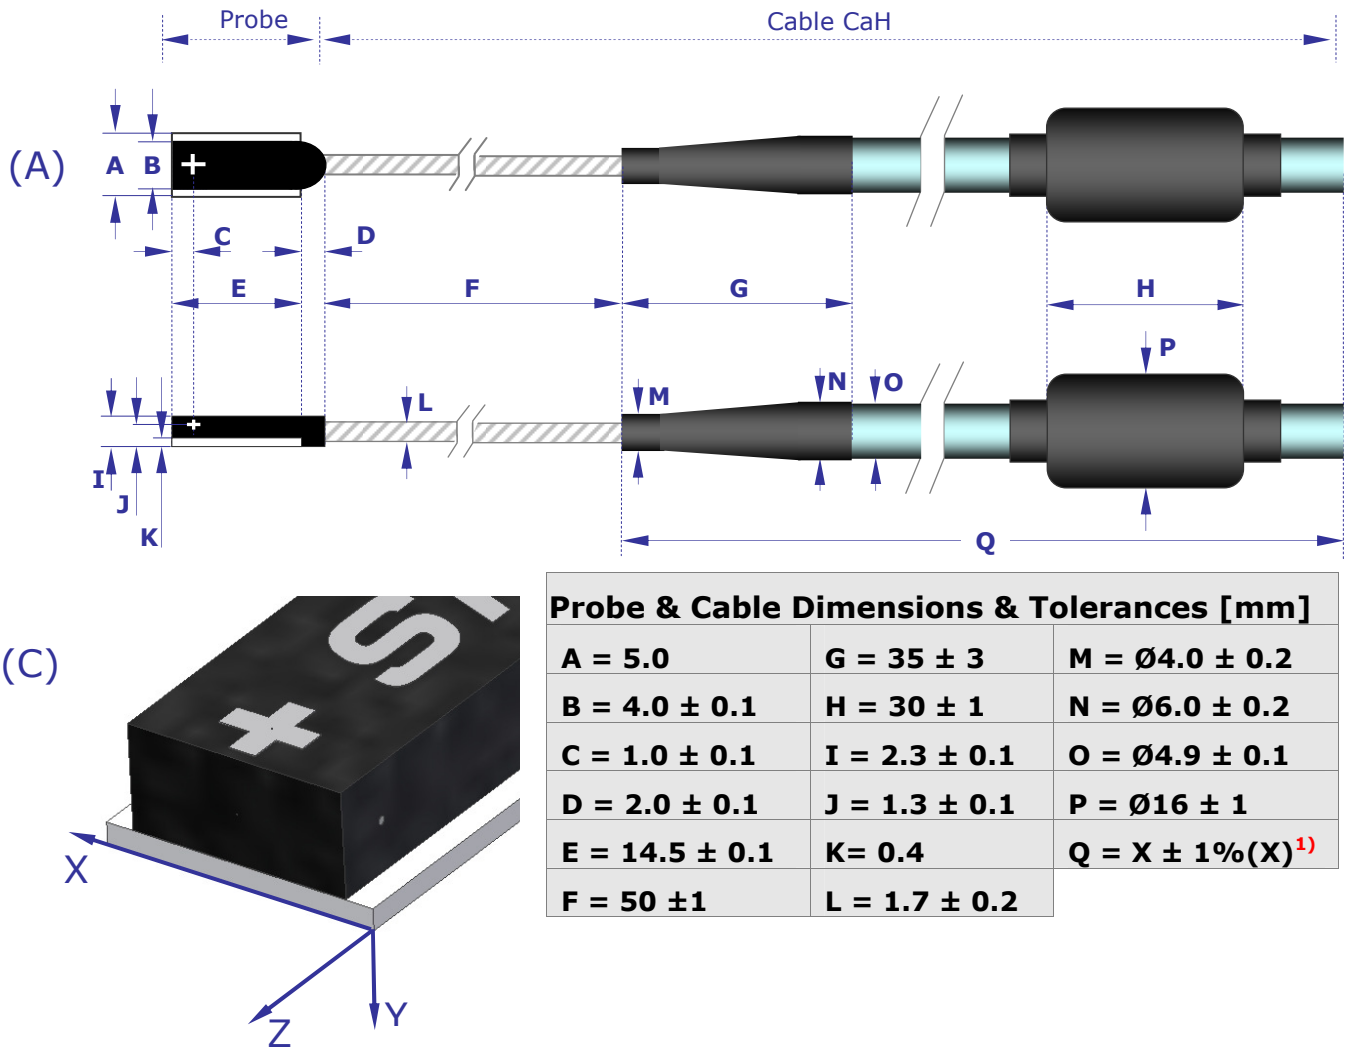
The dimensions of SENIS C-H3A-xx Hall probe and cable (Module H): (A) Top view; (B) Side view; (C) Isometric view with reference Cartesian coordinate system of the probe head. Field sensitive point (FSP) is marked with the white cross.
